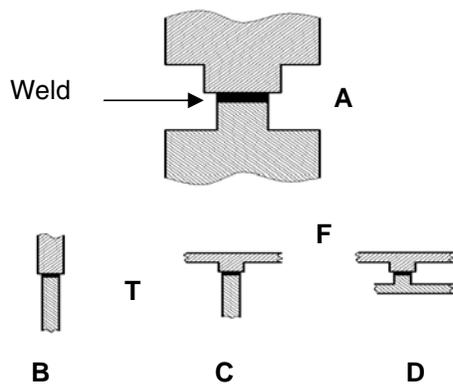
Welded joint design basics. Agenda: A—standard; B—straight; C—T-type; D—shear/lap; E—flange (T-type joint); T – vertical wall/plaque.
